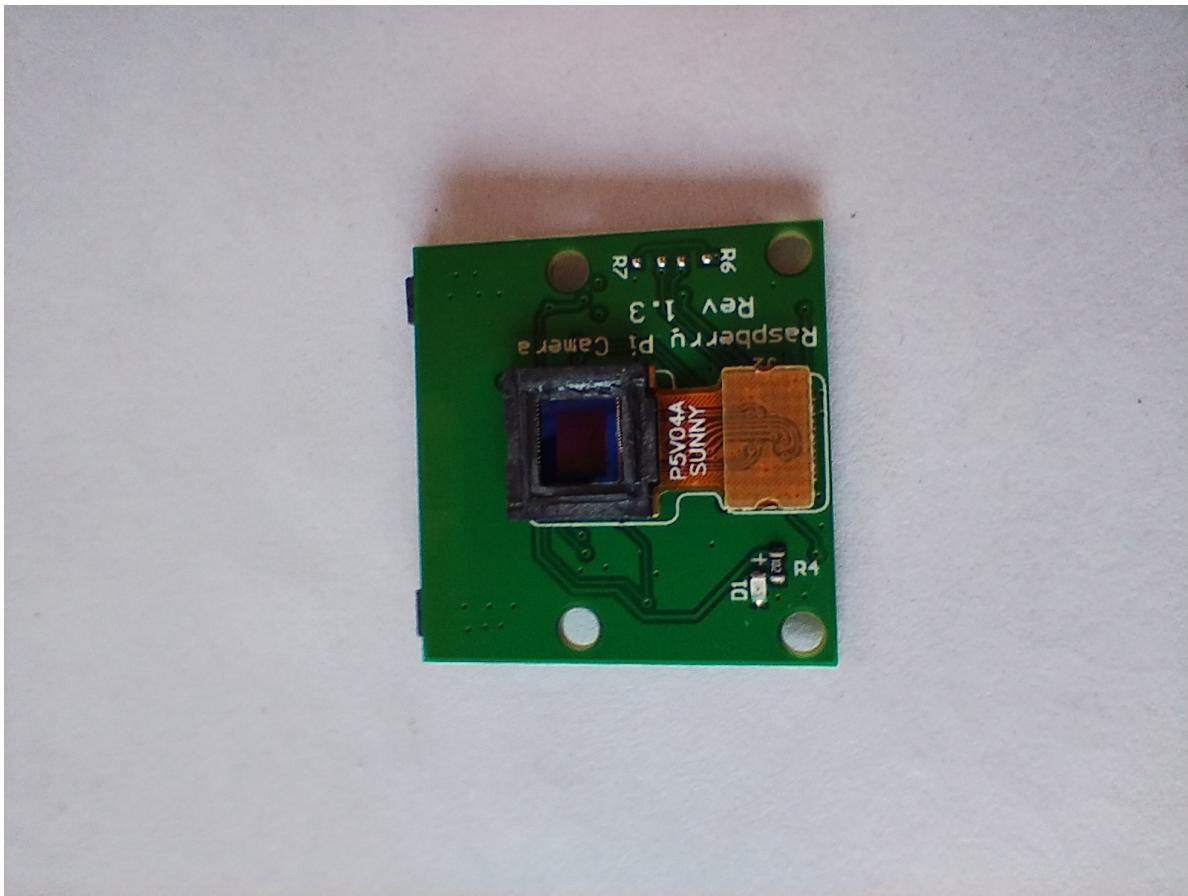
End result: Sensor was fixed with the tape and ribbon was plugged into the board's connector during reassembly
